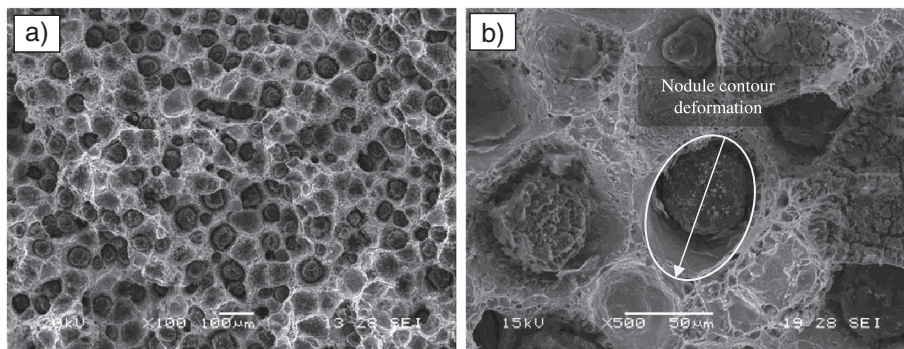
Fracture surfaces of the specimens broken under quasi-static loads.
